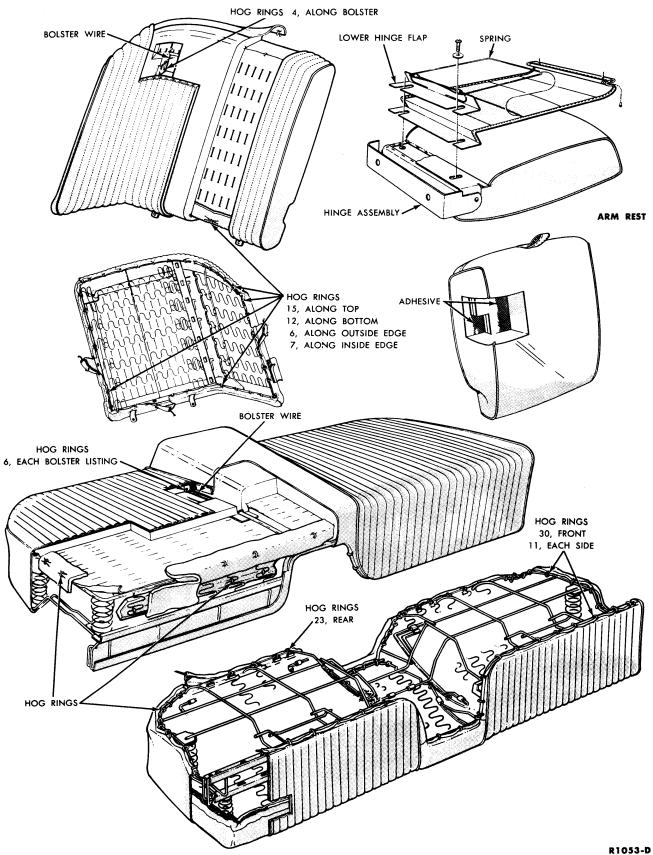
Rear Seat Back, Cushion and Arm Rest Trim
